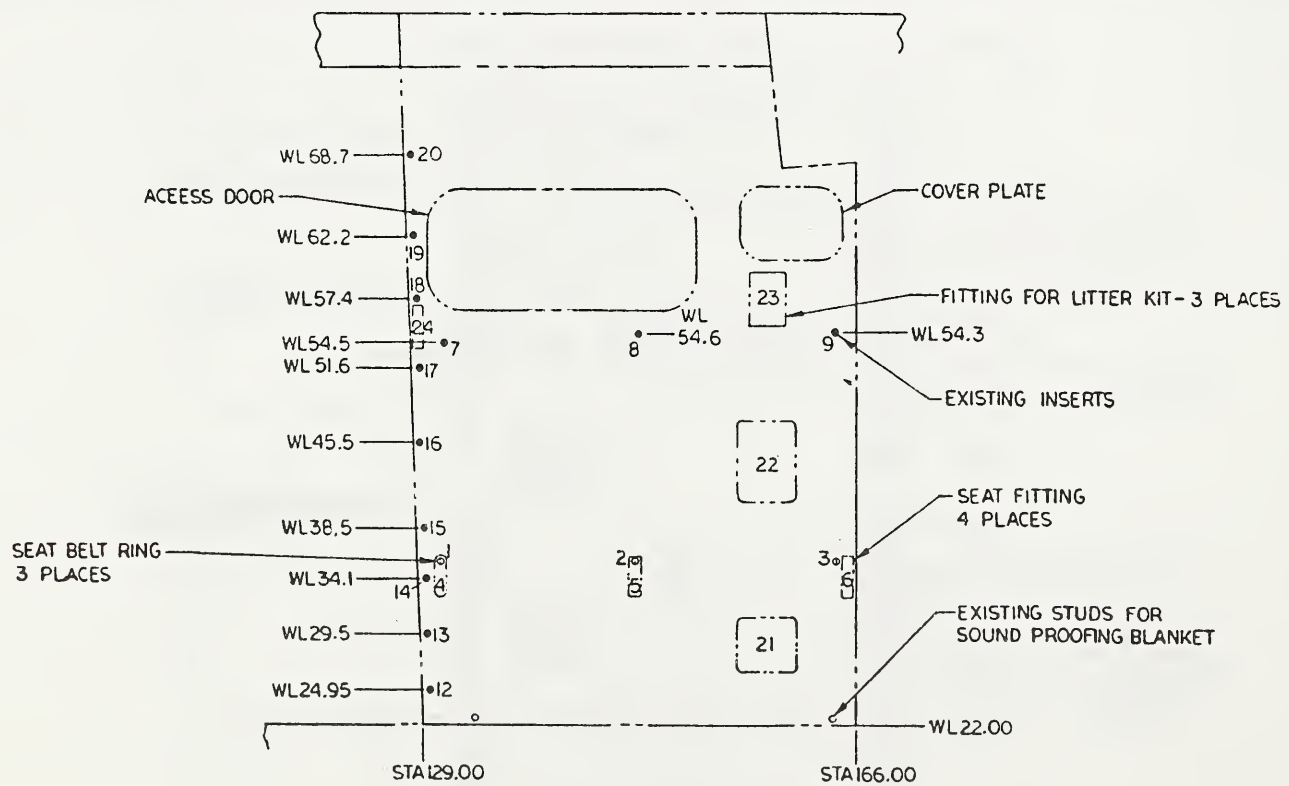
Bell 214B B.L. 14 lefthand wall fittings.
